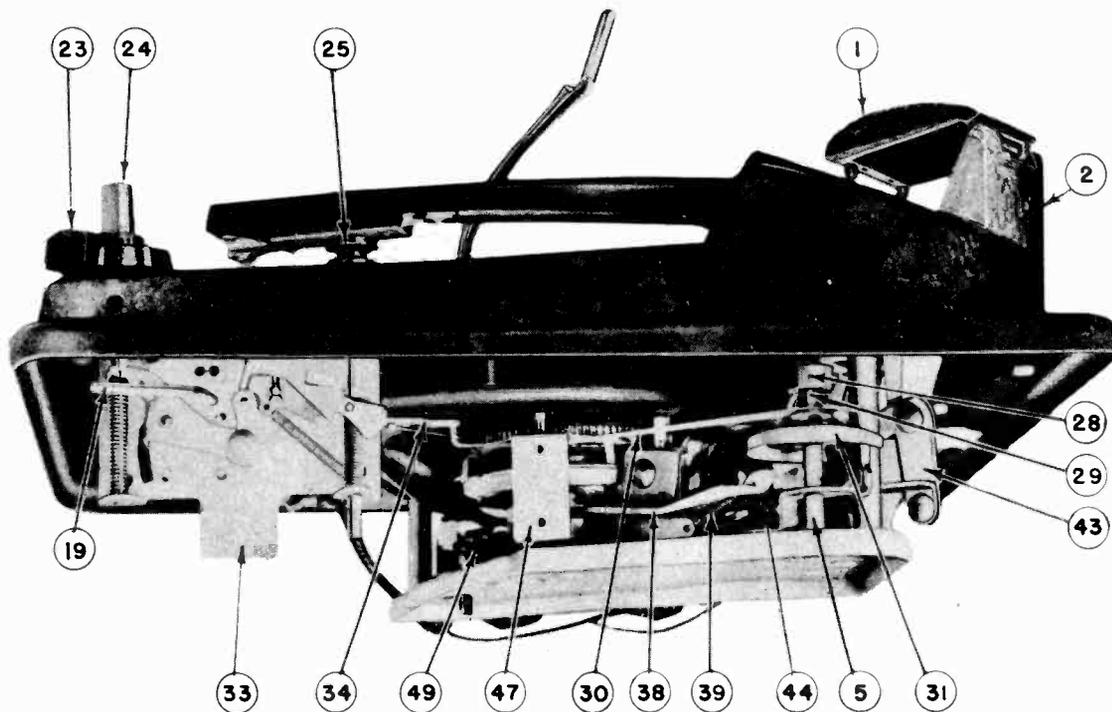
PARTS LOCATION -- RIGHT SIDE VIEW
